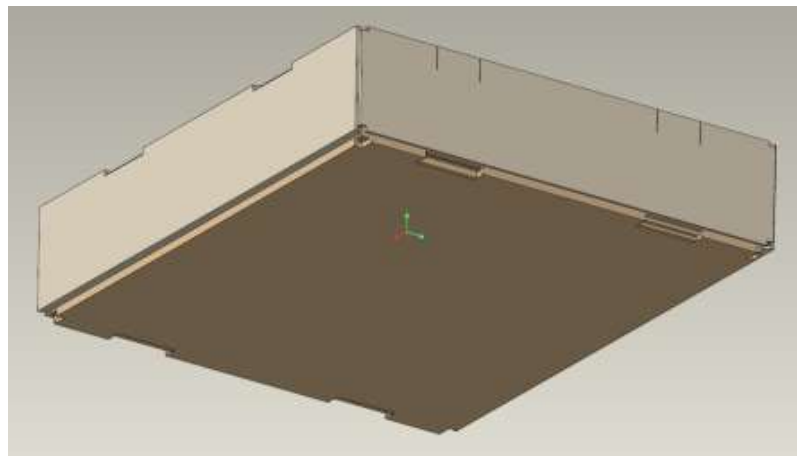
Assembling the designs together and checking their dimensions 1.
